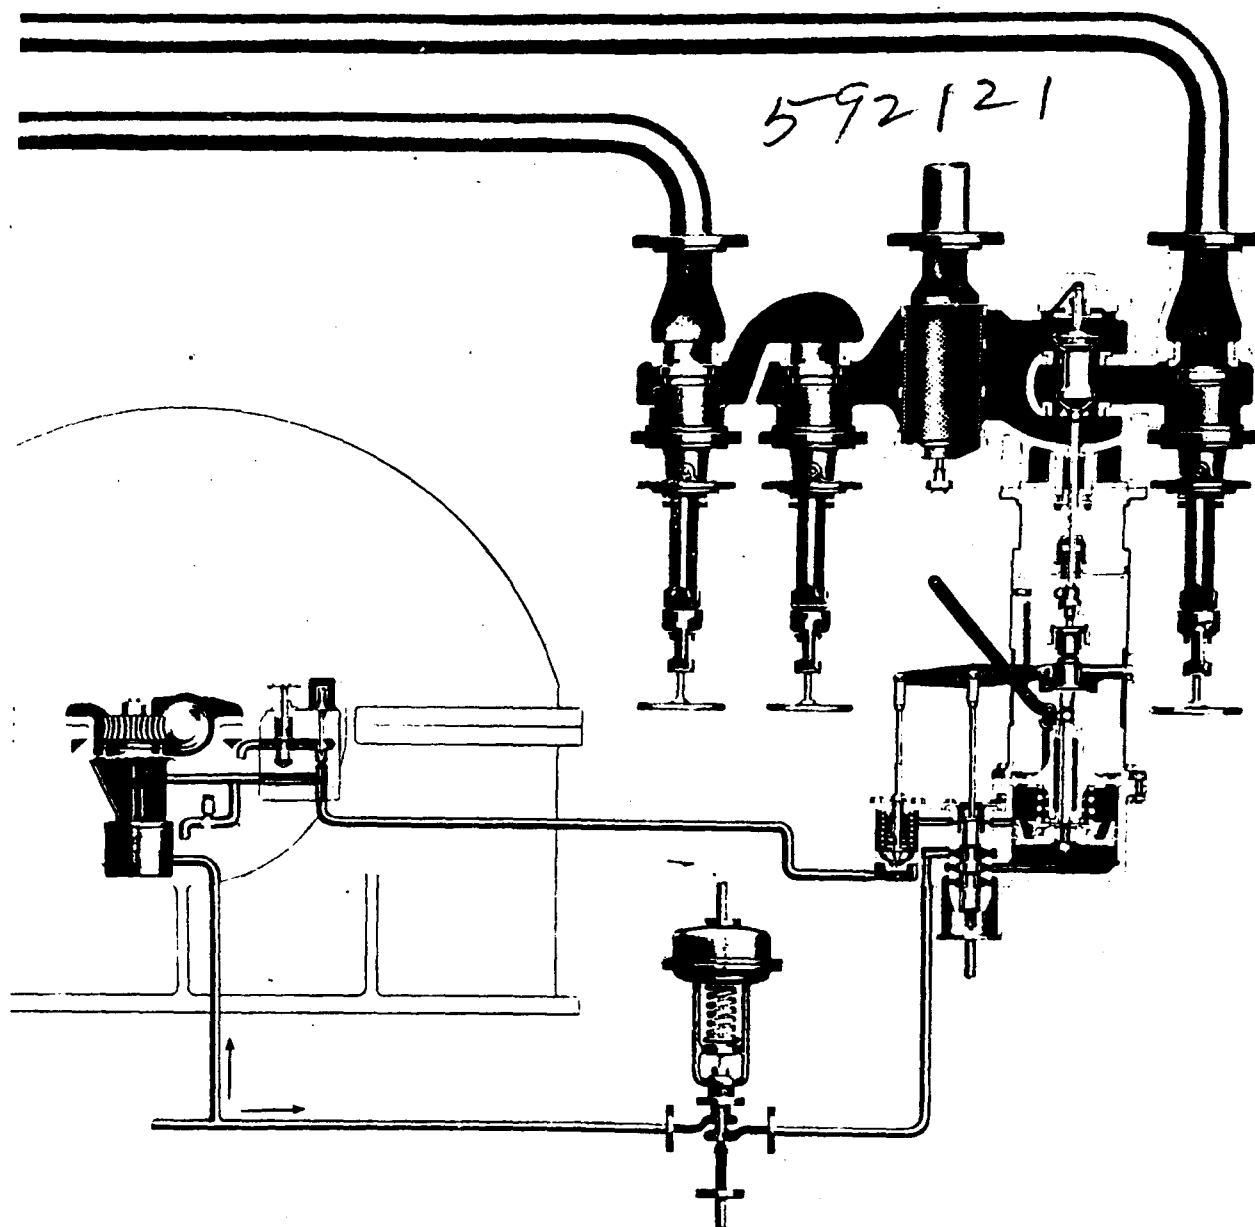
CONTROL OF STEAM FLOW TO TURBINES ON TURBINE-GEAR SHIPS
